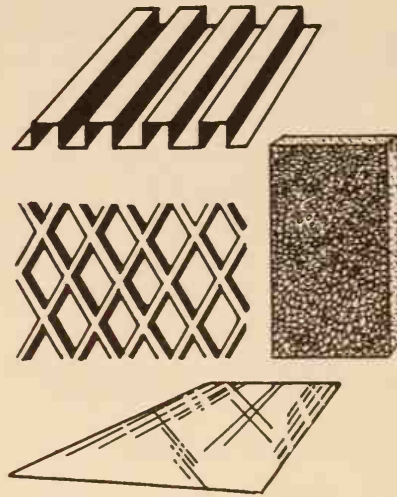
Texture can be added by hammering, perforating, cutting, or forming the metal.
